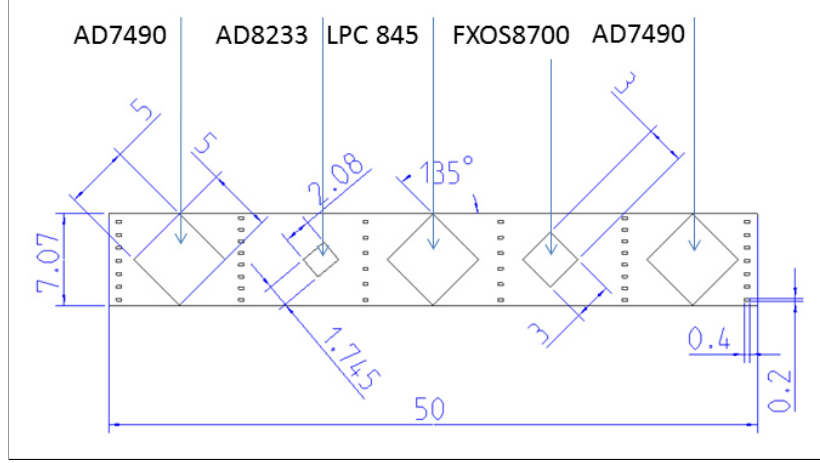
Sample sensor module components, the smallest footprints are SMD resistors; Dimensions in mm
